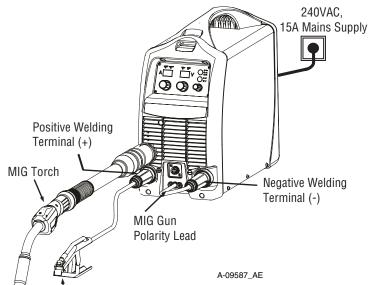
Setup for Mig Welding with Gasless Mig Wire
